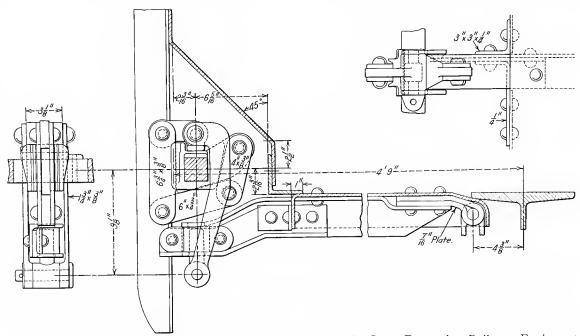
Door Operating Apparatus for Side Dump Gondola Car. Enterprise Railway Equipment Company.
